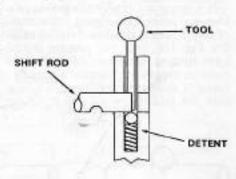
Position tool as shown, push detent ball and spring down while moving shift rod in. Remove tool and push shift rod completely in rod bore.
